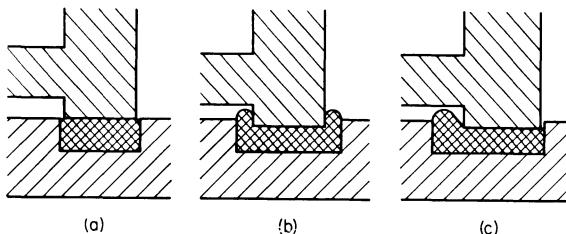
Principles in designing flat gasket seals: (a) bad design; (b, c) good designs; (b) uncentred; (c) centred
